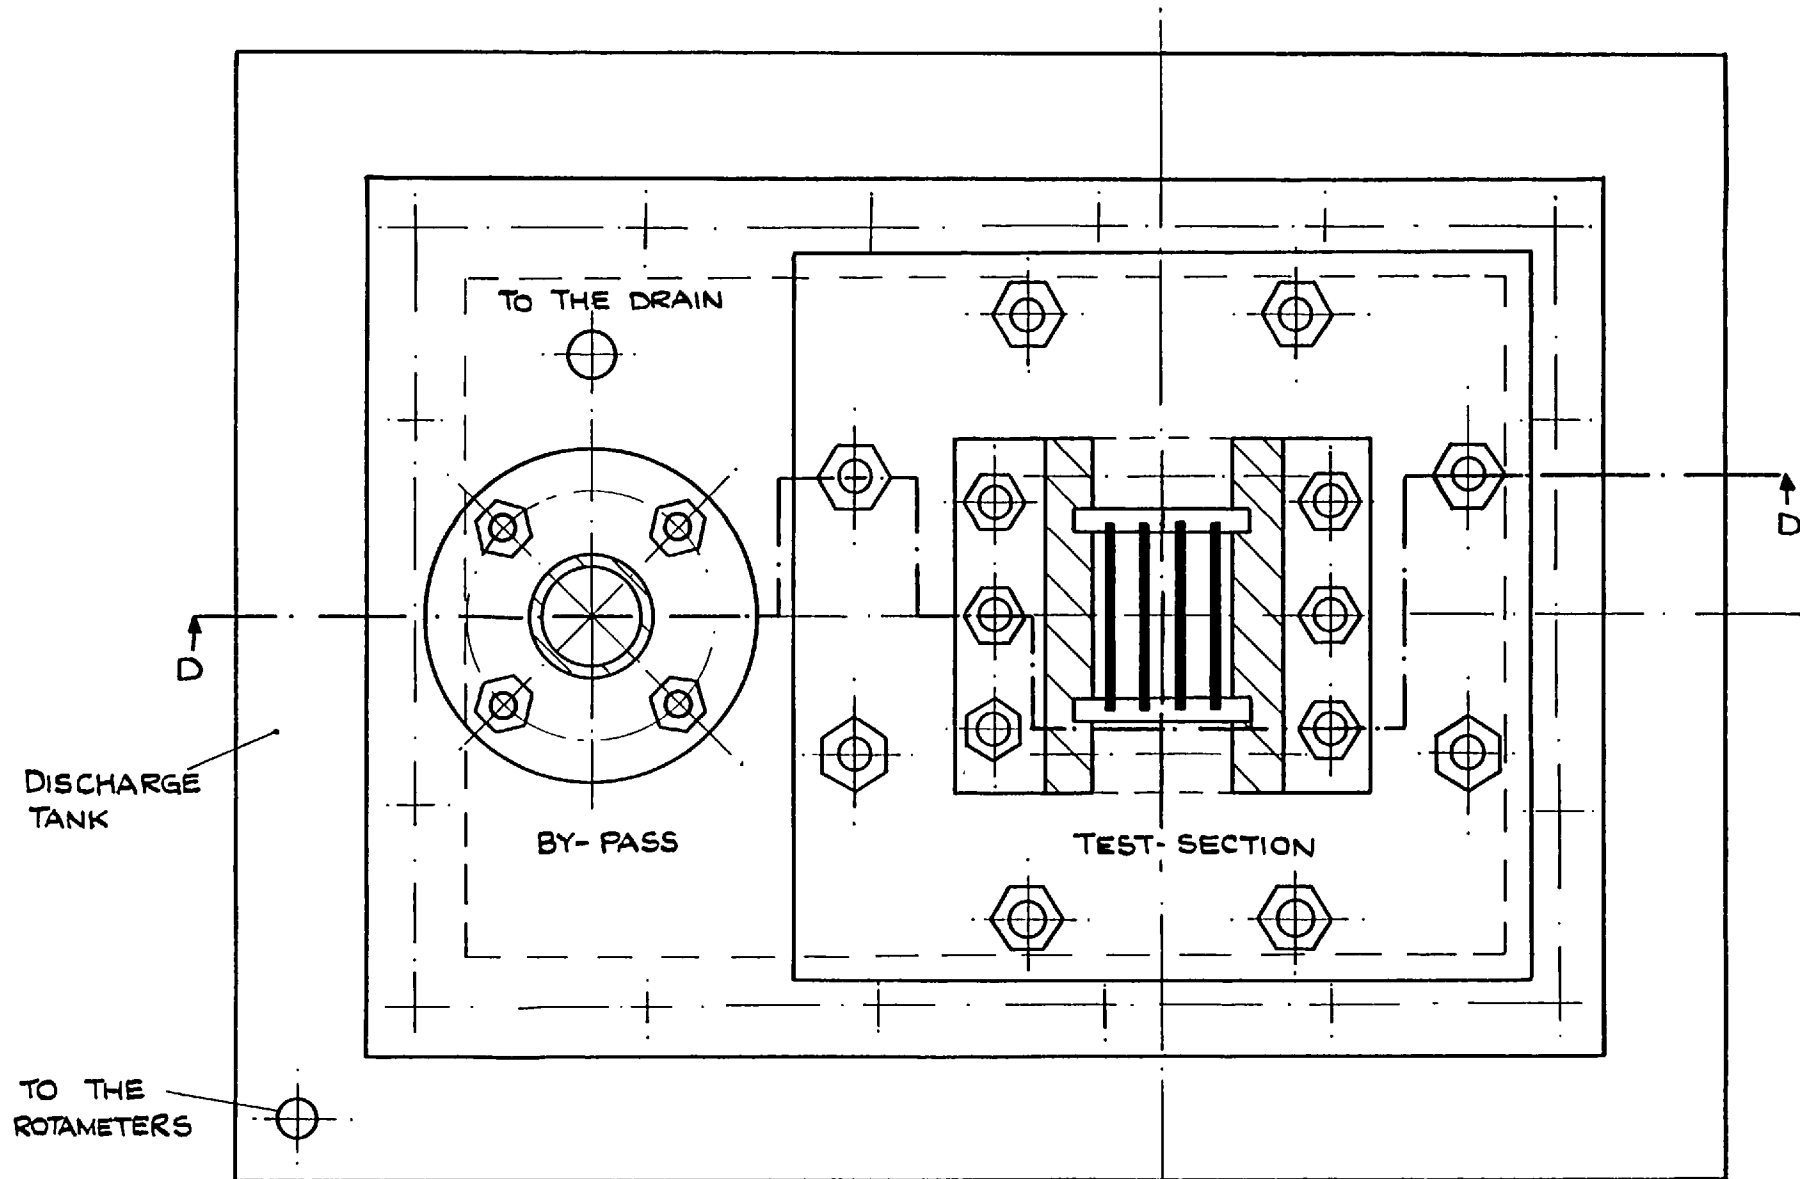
TEST-SECTION AND THE BY-PASS PIPE CONNECTIONS TO THE DISCHARGE TANK (PLAN VIEW).
